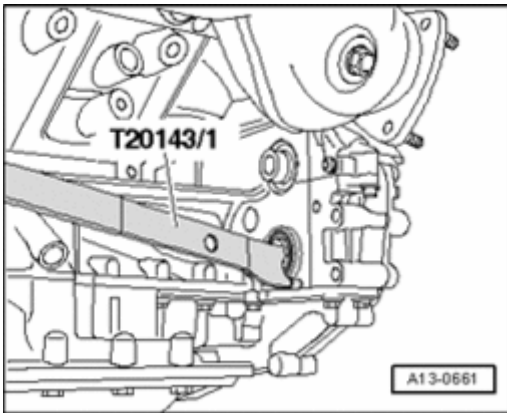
Prying Out Power-Steering Pump Drive Seal Using Pulling Hook T20143/1
